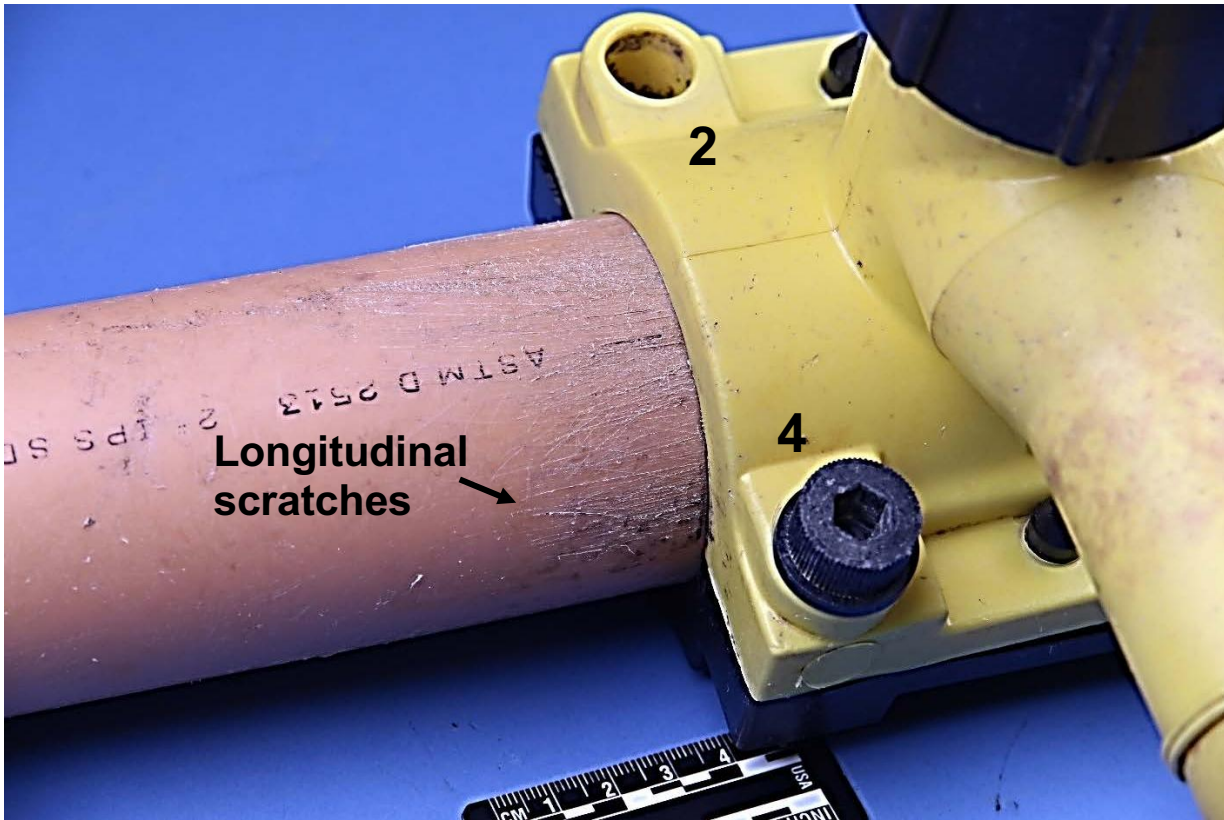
Close-up view of the top portion of the main showing longitudinal scratches that extend out of the tee assembly.
